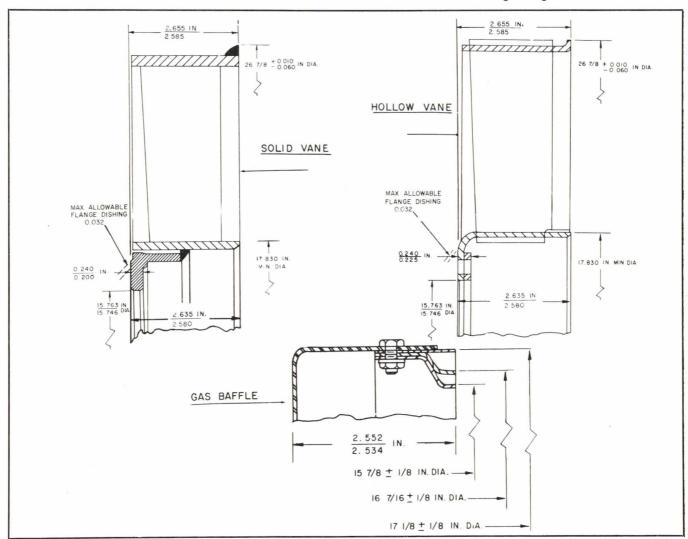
Turbine Nozzle and Gas Baffle Inspection Limits
